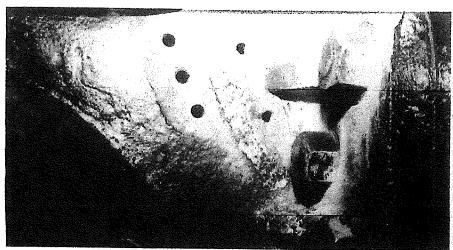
A successful weld completed on 5367 at the Cowra locomotive depot. The drilled holes were for the mechanical brace that held the crack together prior to the more permanent repair.
